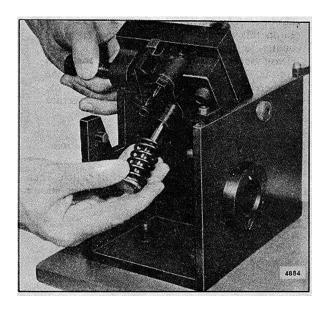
Removing or Installing Plunger Follower, Plunger and Spring
